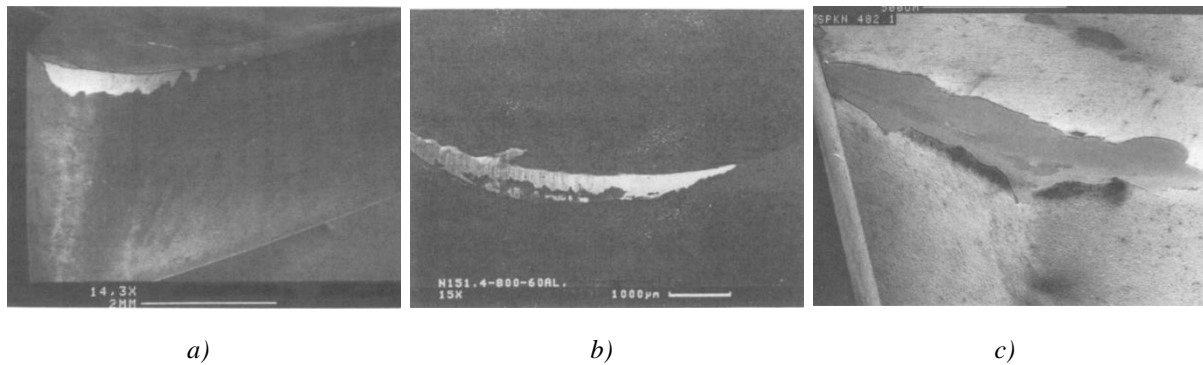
Typical failure modes in PCD-coated cutting tools: a) OM macro photograph showing flaking on a diamond-coated turning insert, b) SEM image of the turning tool edge damaged by abrasive wear and slight flaking, c) SEM micrograph illustrating severe flaking of a diamond-coated cutting edge of a milling tool [25].
